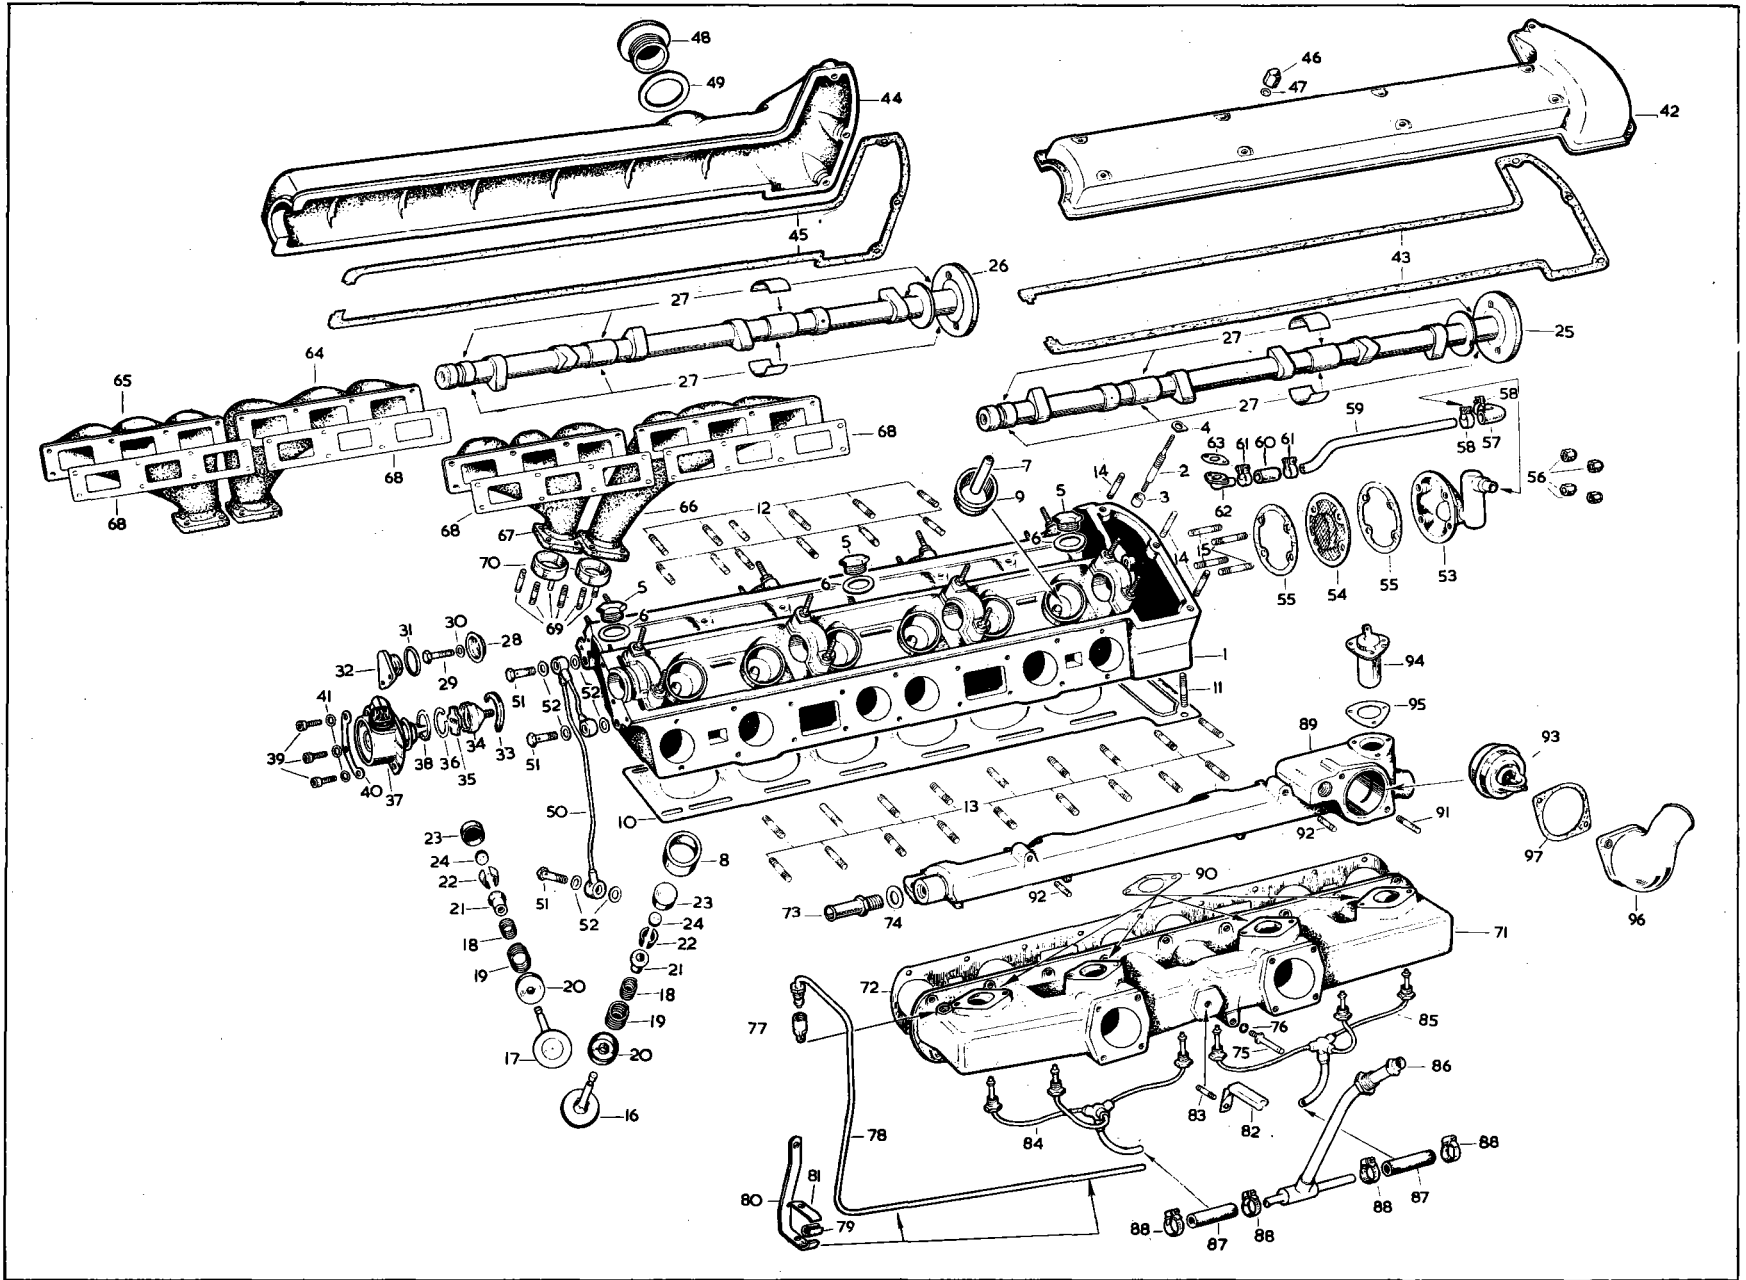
Exploded view of cylinder head (3.4|3.8 litre illustrated).
